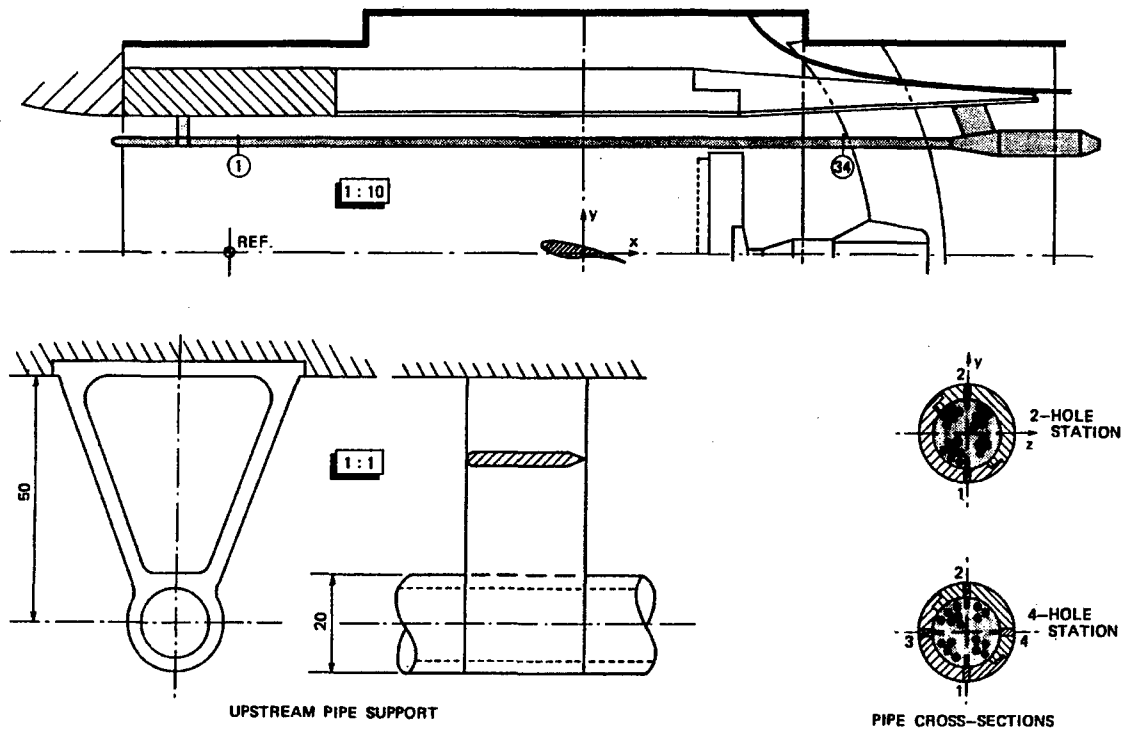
Calspan pipe and its mounting in the NLR Pilot Tunnel
